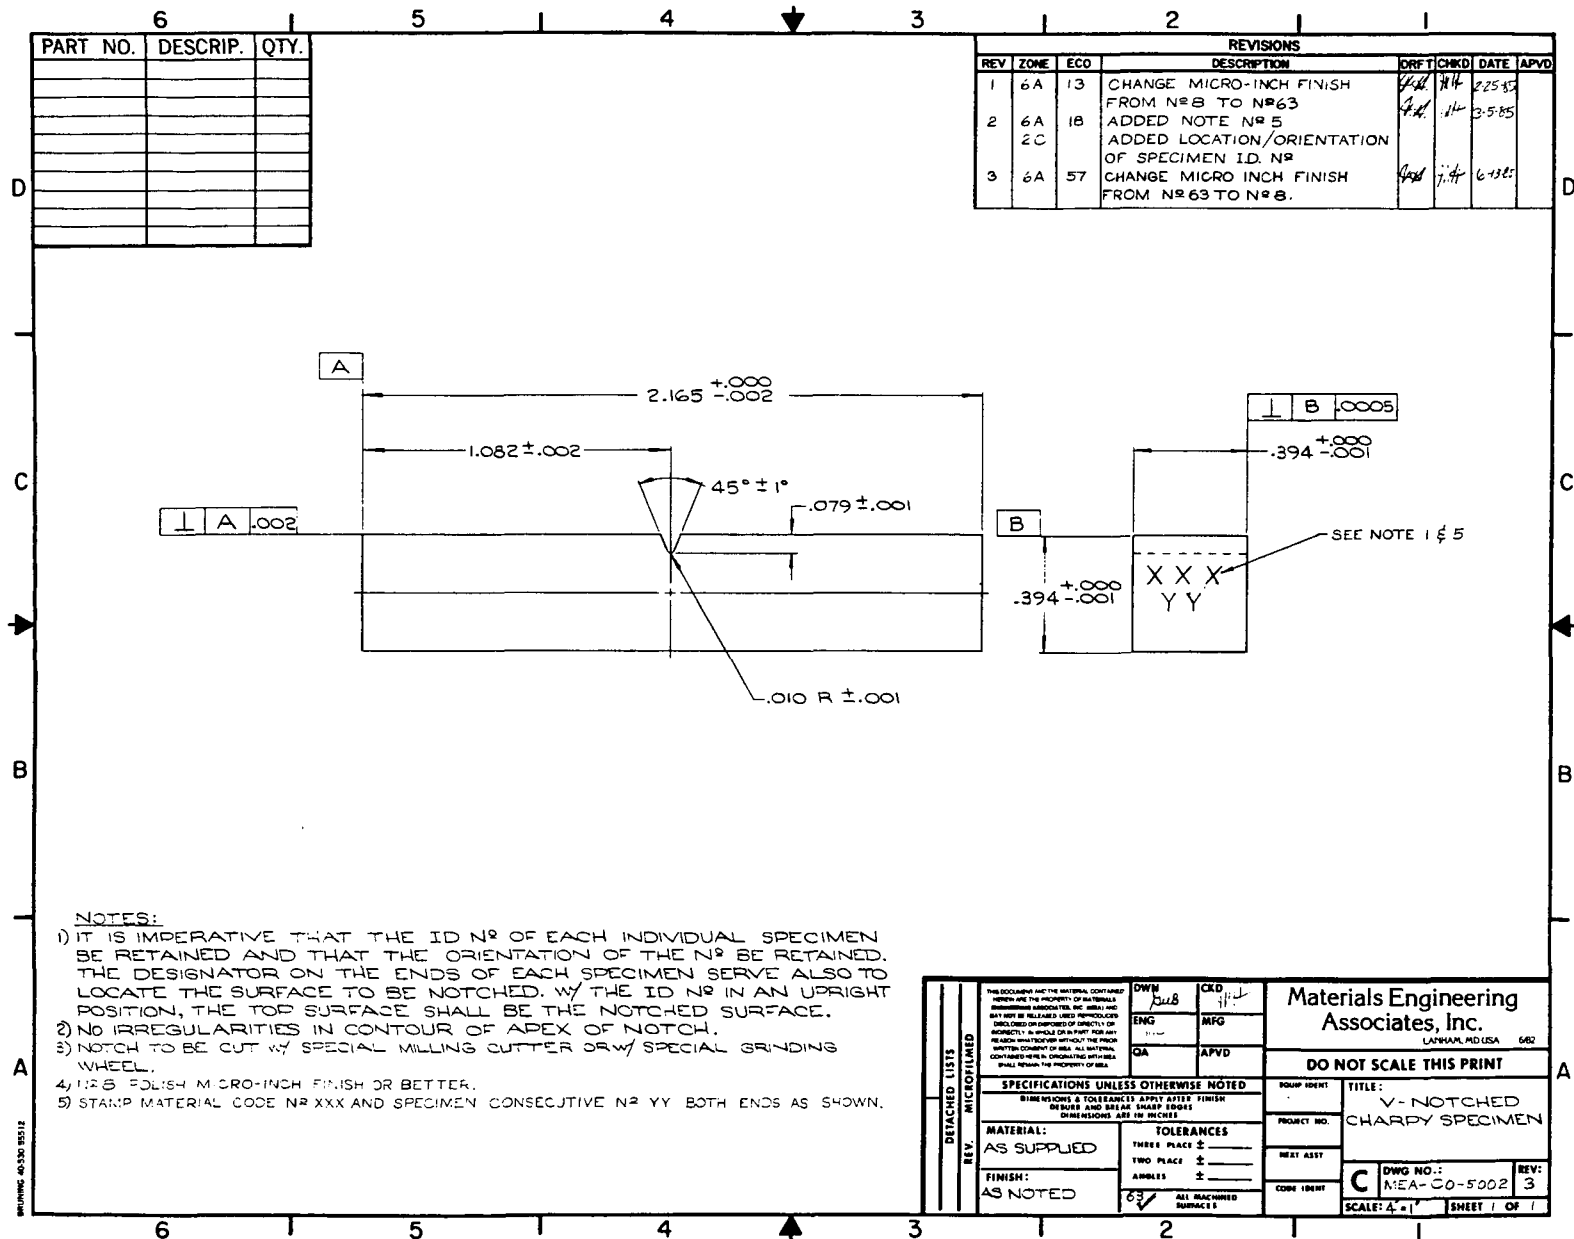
Design of Charpy V-notch (C_v) test specimen.
